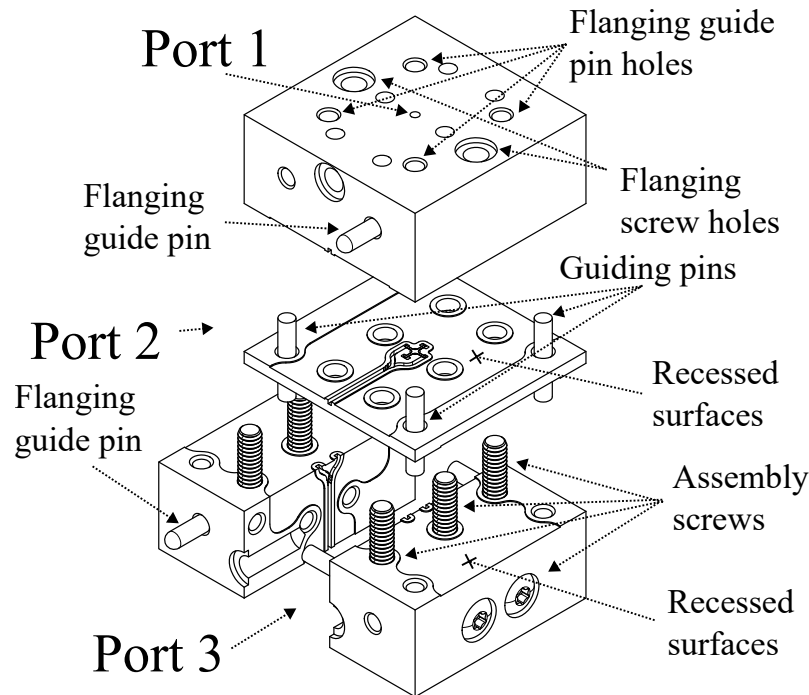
Exploded view of the manufactured block with screws, guiding pins for assembly, recesses and waveguide flange layout.
